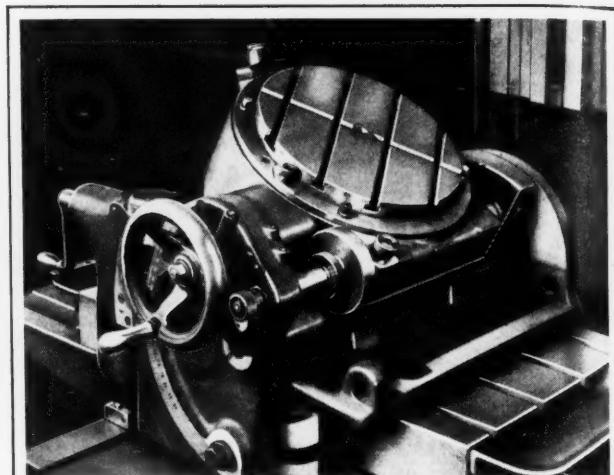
Tilting Type of Rotary Table Brought out for Application to the Pratt & Whitney Jig Borer
